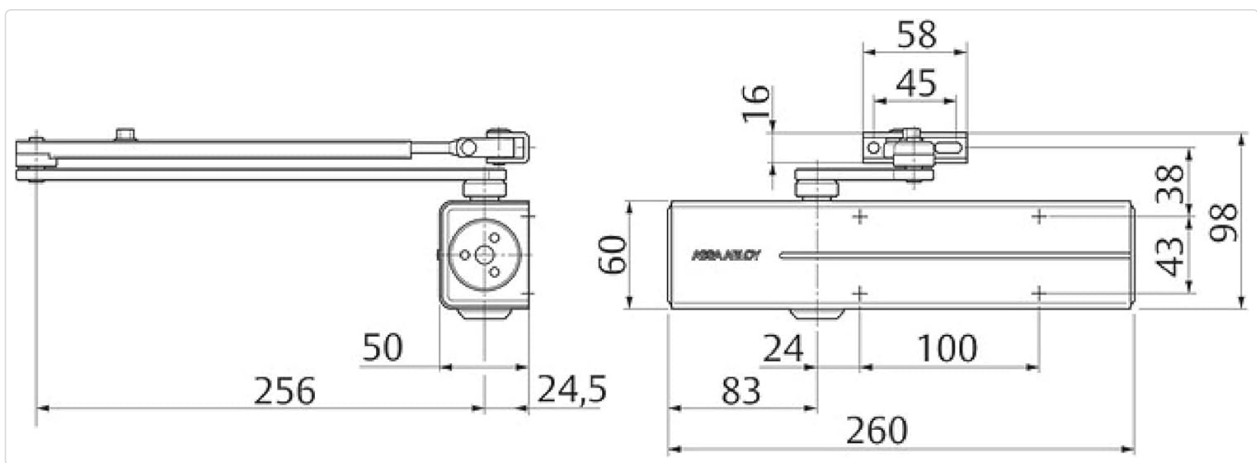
Technical drawing showing dimensions (in millimeters) of the Yale DC300-D9005 door closer body and its mounting points. This diagram is essential for precise installation planning.
